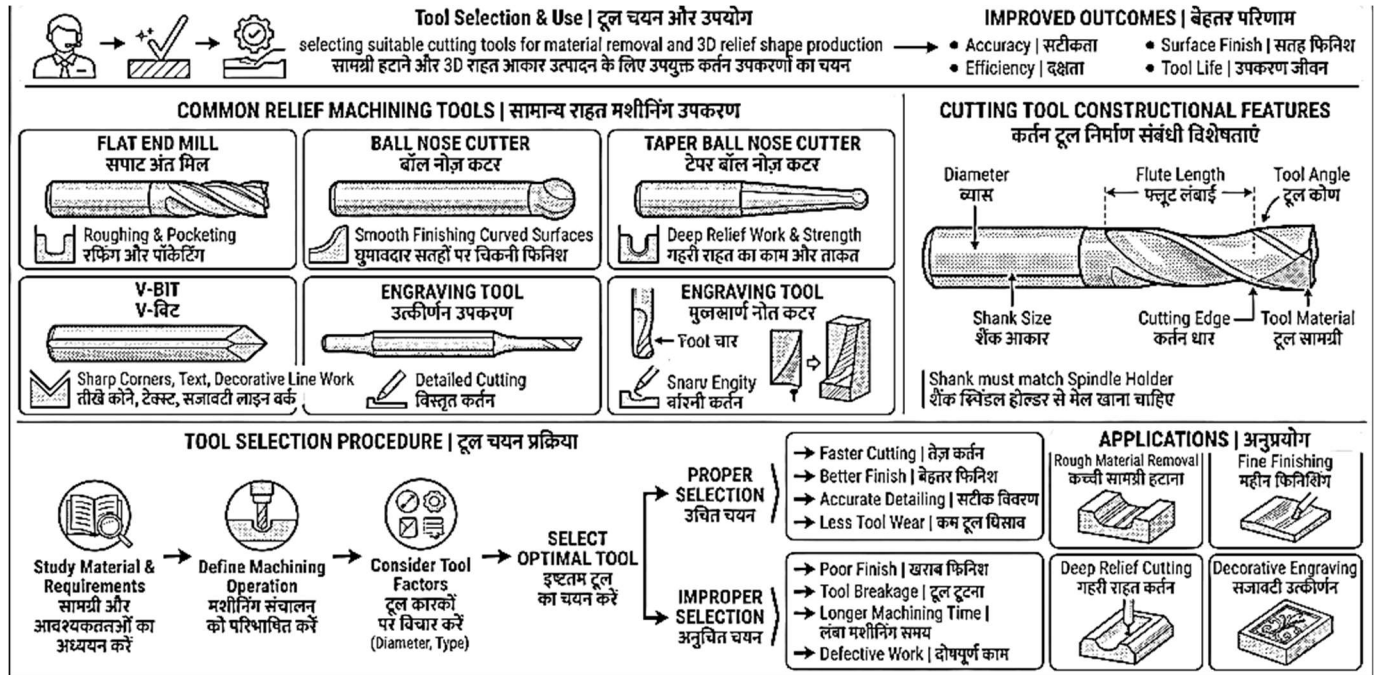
Relief Machining Tool Selection and Cutting Tool Features | रिलीफ मशीनिंग हेतु टूल चयन और कर्तन उपकरण विशेषताएँ
